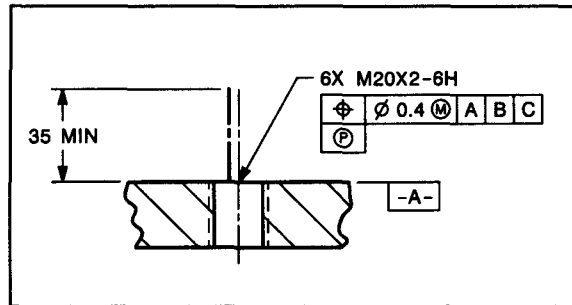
FORMER METHOD OF INDICATING A PROJECTED TOLERANCE ZONE
